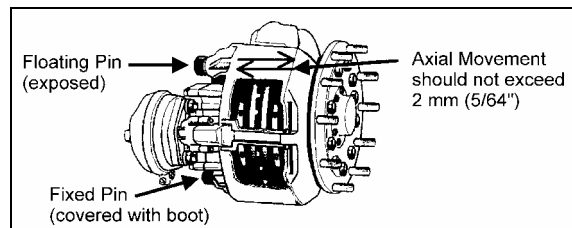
CALIPER AXIAL MOVEMENT 12132
